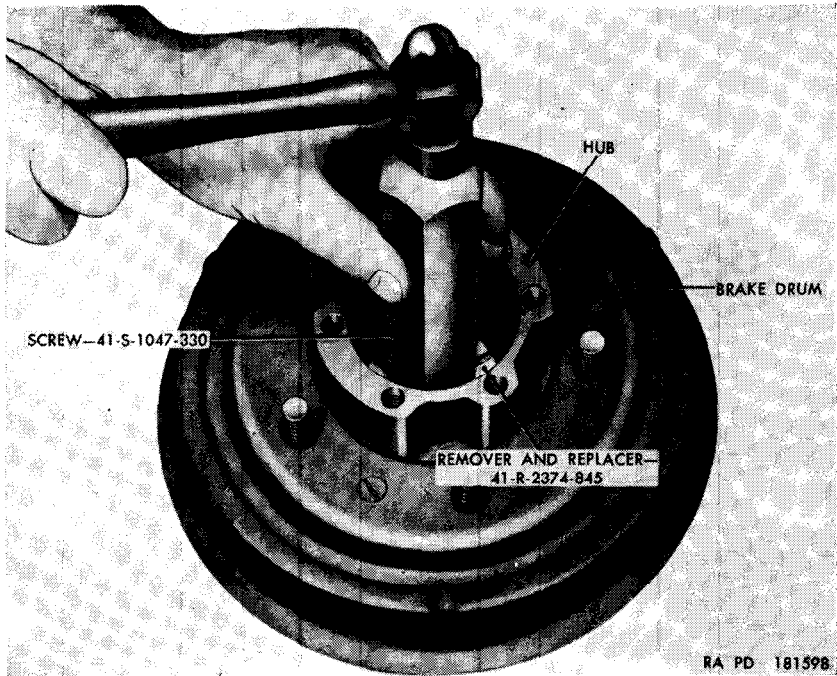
Removing front hub bearing cup with remover and replacer 41-R-2374-845 and screw 41-S-1047-330.
